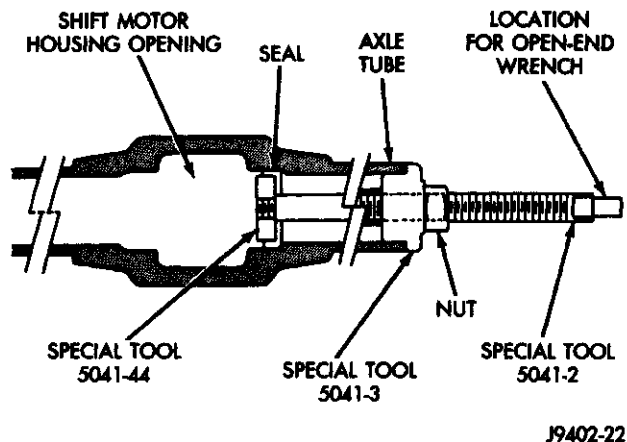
Inner Axle Seal Installation—216 FBI Axle
